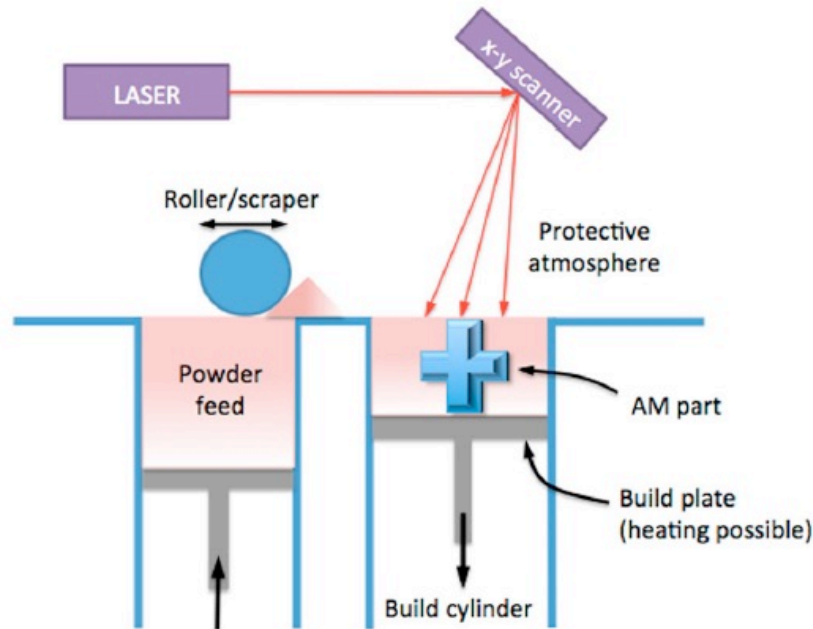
Illustration showing the powder bed laser additive manufacturing process, using a laser as heat source to melt the powder layer [17].
